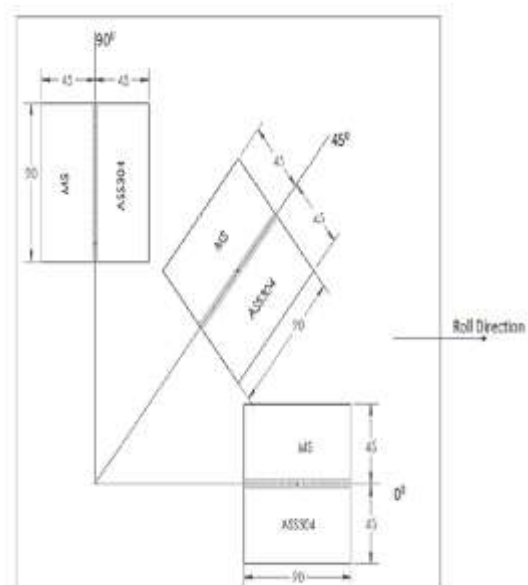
Sheet metal welds of Mild steel & ASS 304 in different sheet roll directions
